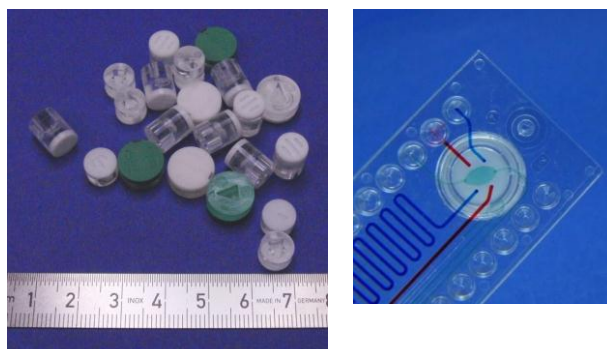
Different examples of the two-component injection molded valve body (left) and a complete valve assembly on a microfluidic chip (right).
